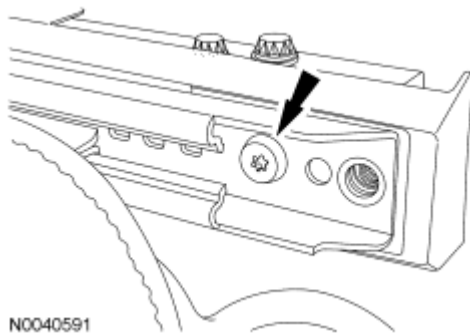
Locating OCS Rail Front Mounting Position Rear Bolt
